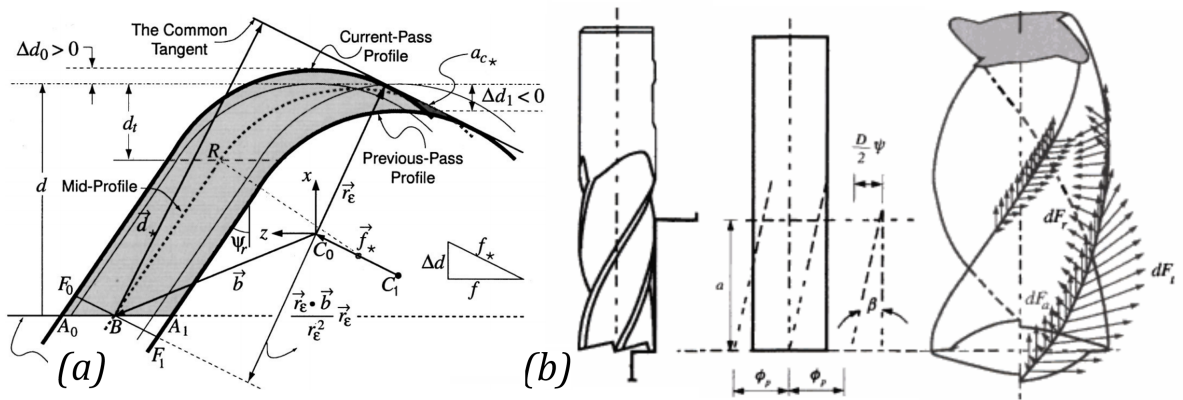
(a) uncut chip geometry in turning [4], (b) discretized helical end mill [3]
